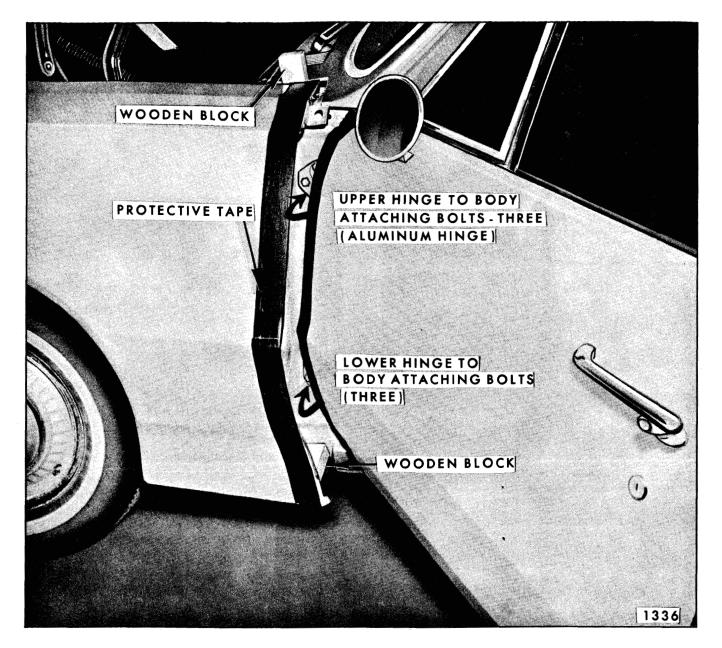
Front Door Hinge Attachment - "A" Styles
